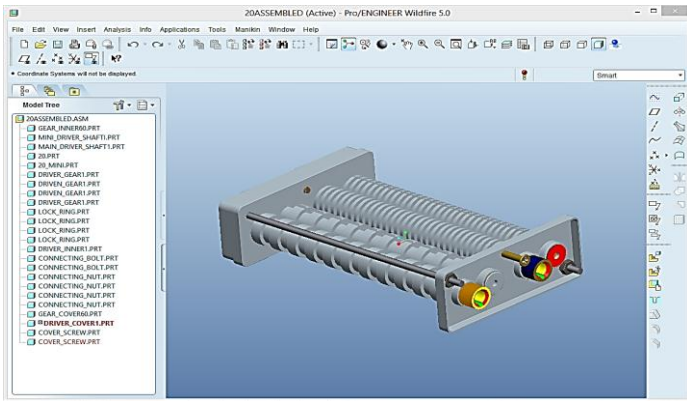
Screenshot showing the inner section of the Machine driving side during assembly
